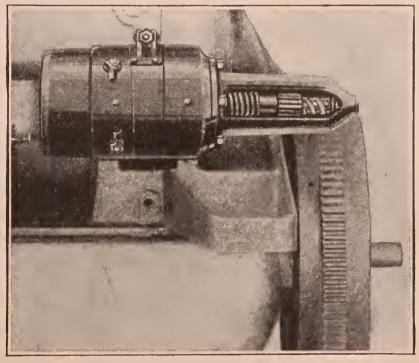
Auto-Lite Starting Motor with Bendix Drive
